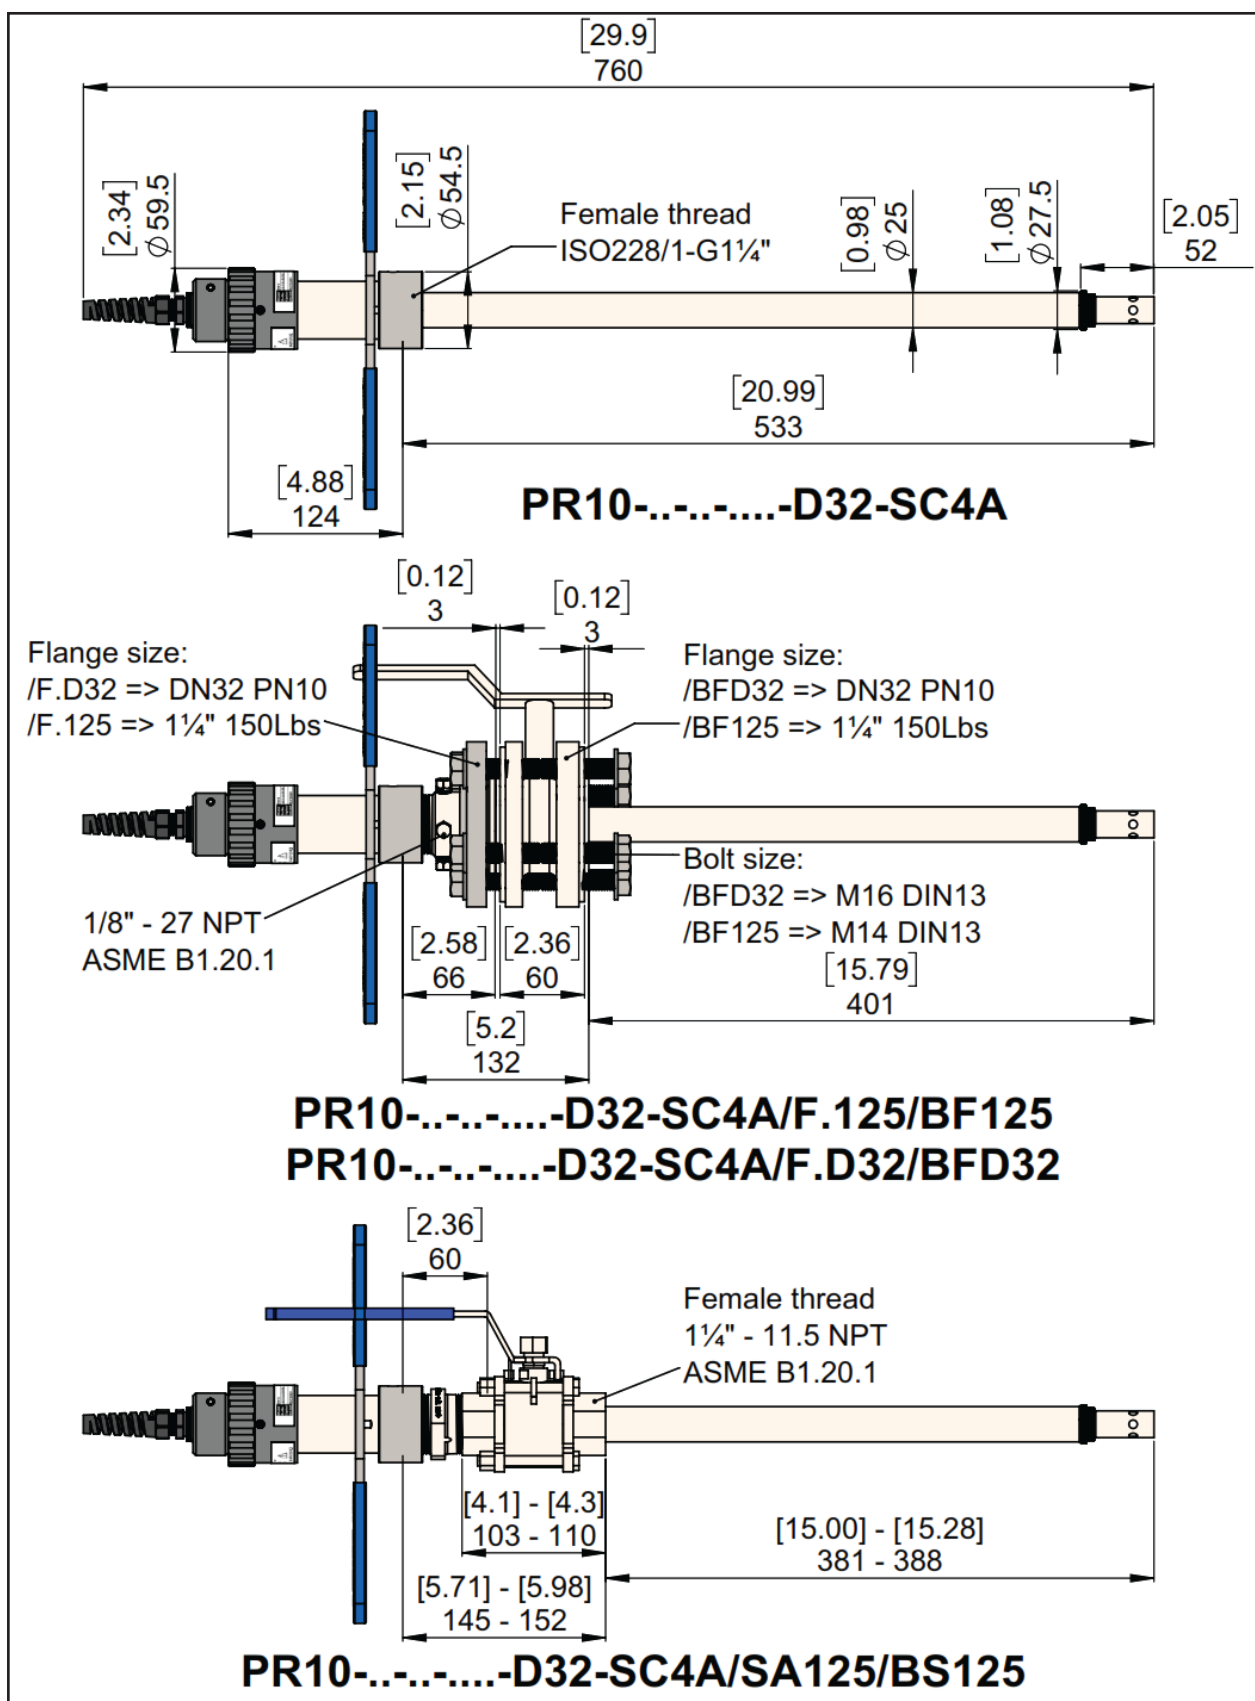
Dimensional drawing PR10...-D32 with mounted SC4A sensor - units in mm [inch]
